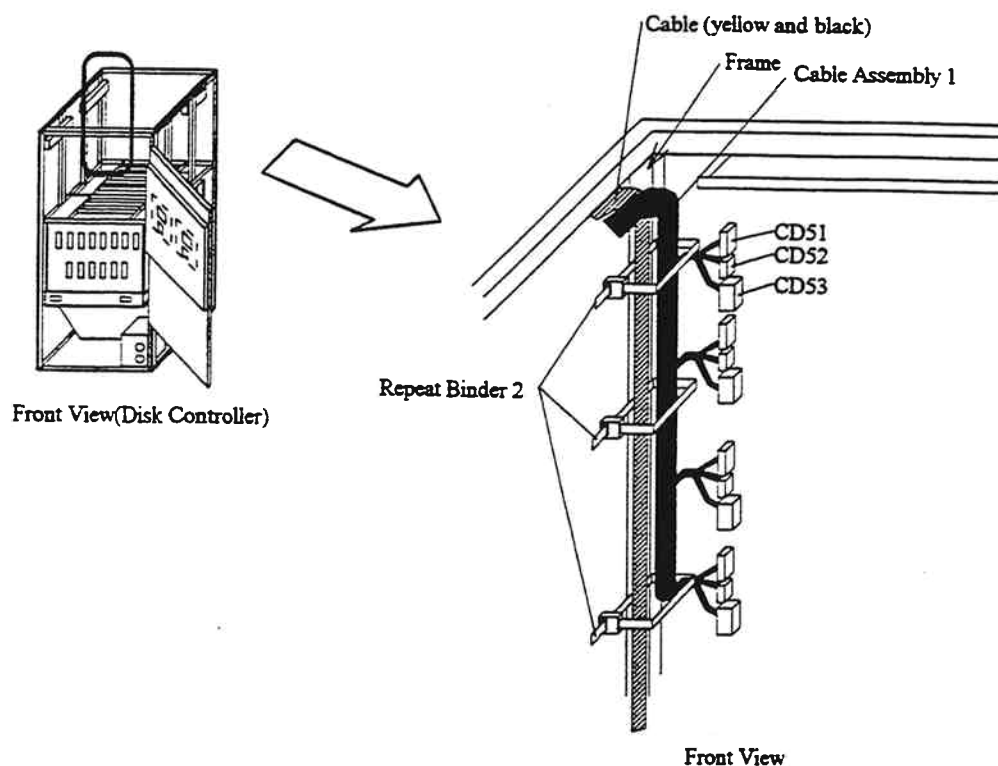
Removal of the Cable Assembly 1
